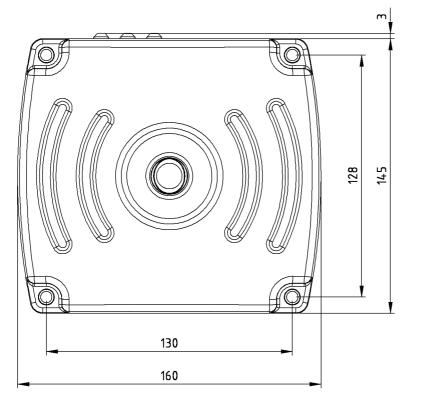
Mechanical Dimensions of UDL120 with steel sides
